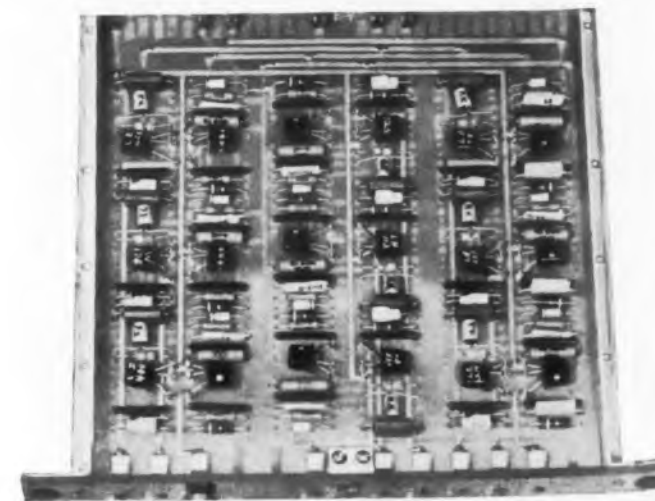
Typical printed wiring assembly. Volumetric efficiency is only 3.2%.
